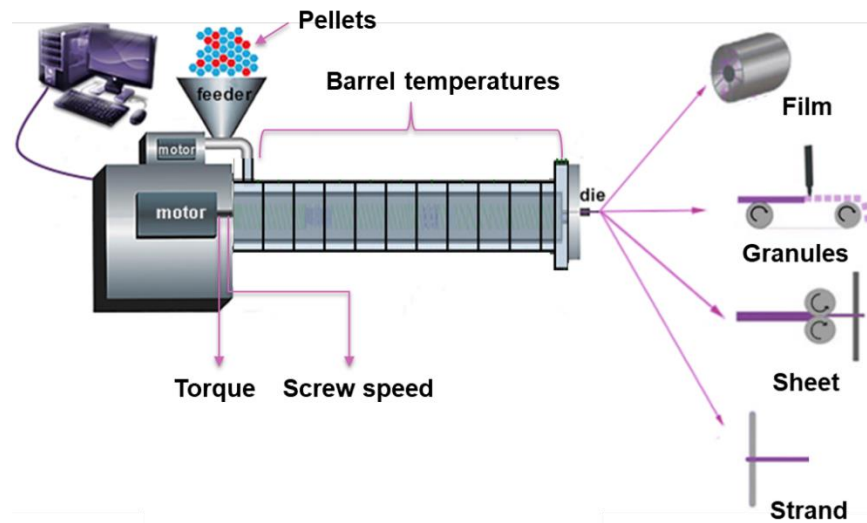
Schematic of melt extrusion process. Pellets melted in barrel, afterwards molten material extruded from extrusion die and molded into desired shape [20].
